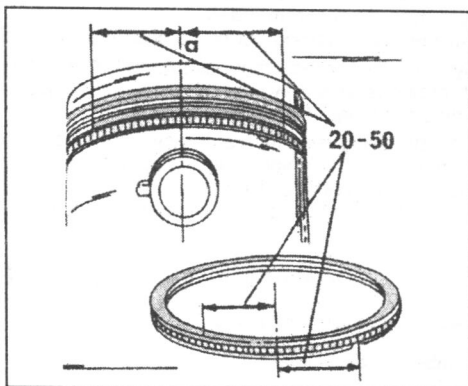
Arrangement of piston ring gaps. The gap of the oil control ring is positioned at "a". The gaps of the other rings left and right as shown.
